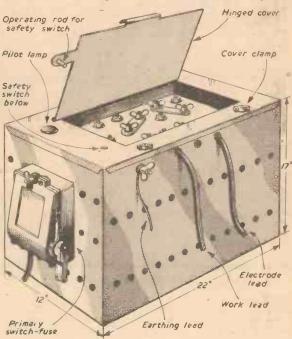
A perspective view showing general arrangement of an A.C. arc welding set.
